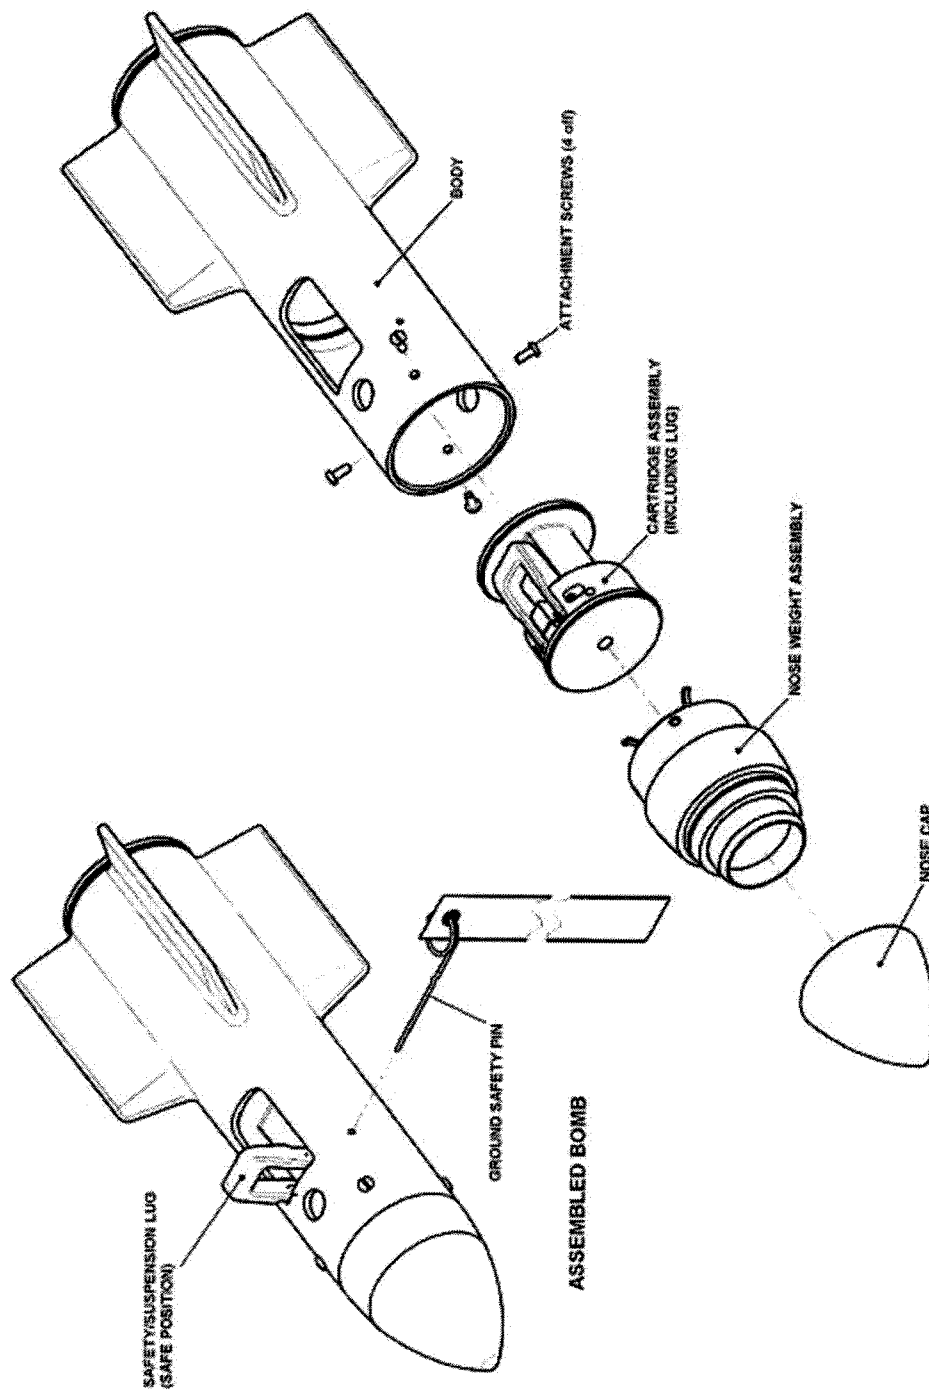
Assembled and Exploded view of 3 kg Practice Bomb including GSP
